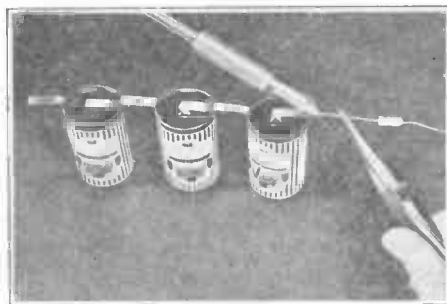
To solder a resistor to a battery terminal strip by means of a lap joint, tin both the lead and the end of the strip, hold the resistor on the terminal strip with long-nose pliers as shown here, and apply the heated soldering iron.
